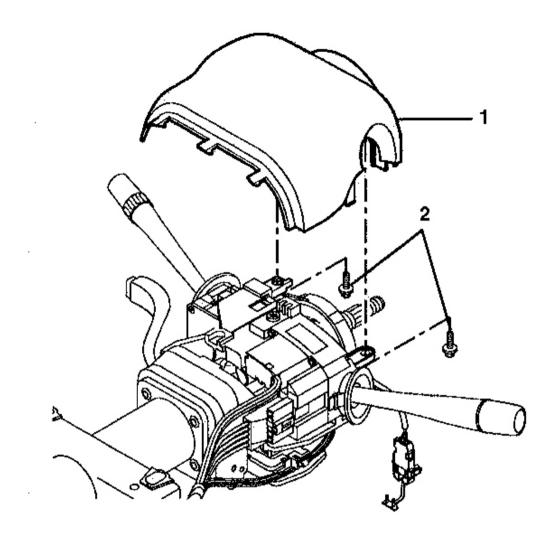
TORX(R) Head Screws & Upper Trim Cover Courtesy of GENERAL MOTORS CORP.
